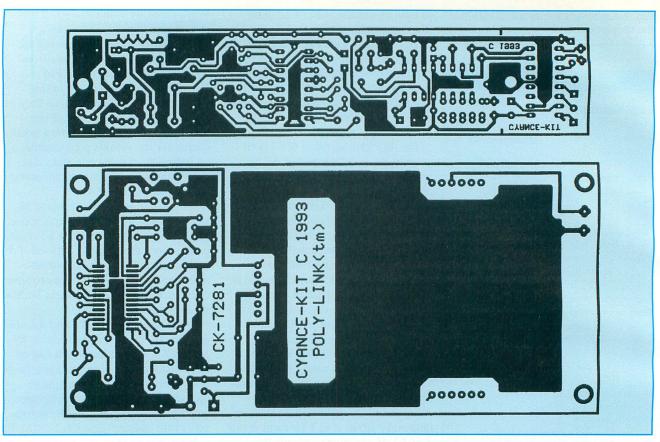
Actual-size etching-and-drilling guides for fabricating (A) the transmitter and (B) receiver printed-circuit boards needed for this project.
